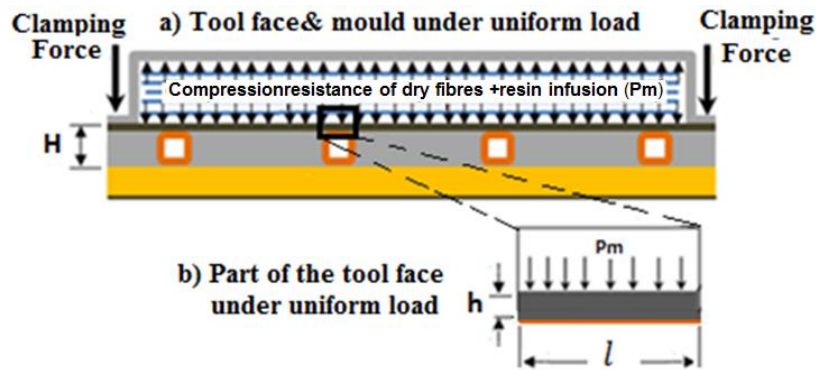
Section of the proposed tool model as used in RTM, with compression of reinforcement.
